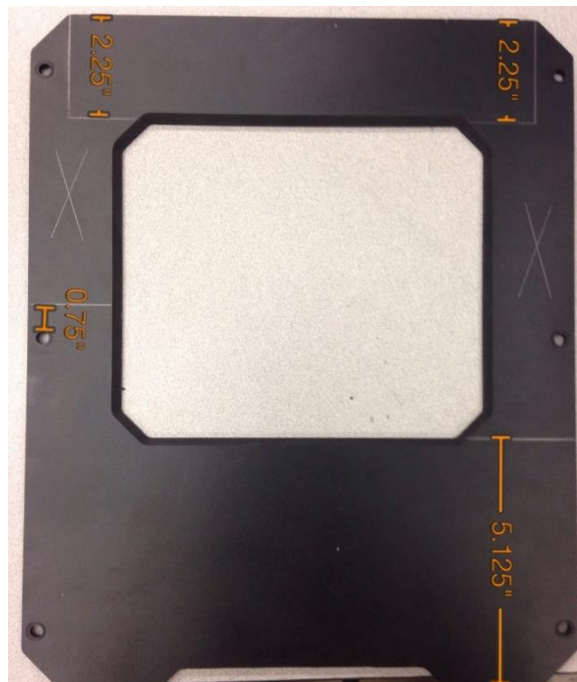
This left side panel is marked where it should be cut. The Xs show material that can be thrown away.
